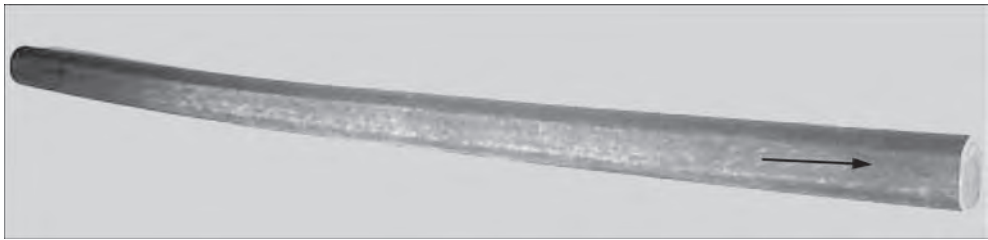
Bimetallic rod produced by explosive welding of copper base with steel tube
